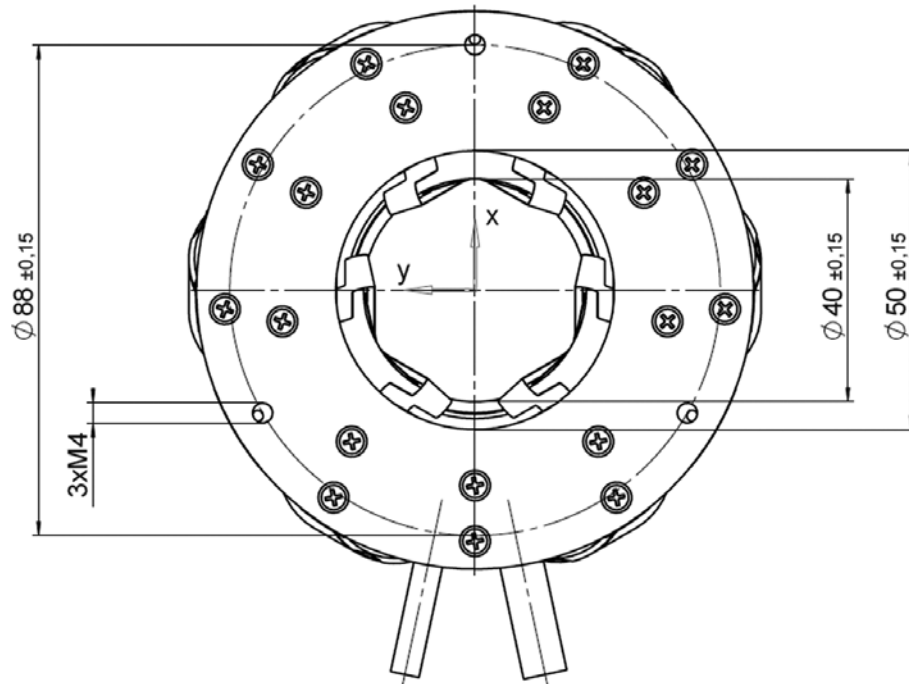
H-810.00 miniature Hexapod, top view (dimensions in mm)
